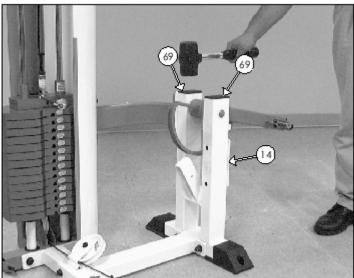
Using a rubber mallet, insert two Plastic Insert Caps 2 X 3 (#69) into the tube-end of the Side Frame (#14).
